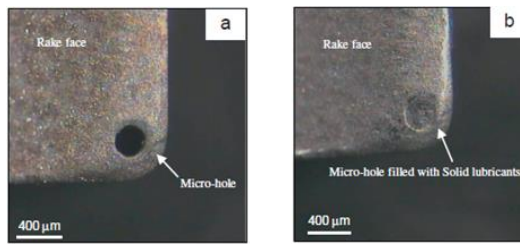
Micro hole in the rake face of the carbide tool filed (a) without (b) with MoS_2 solid lubricants. [6]
